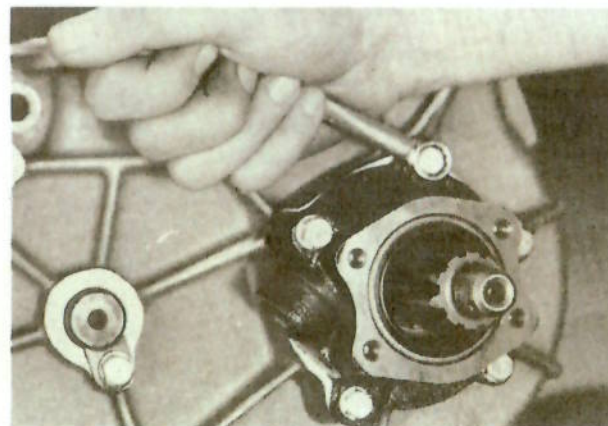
REMOVING THE SPEEDOMETER GEAR HOUSING FROM THE TRANSFER CASE.
